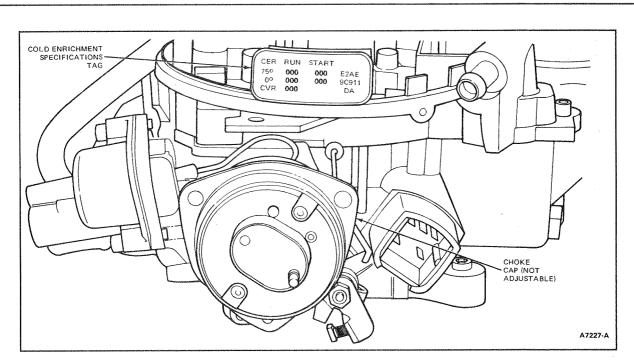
Cold Enrichment Rod (CER) Adjustment Sequence
